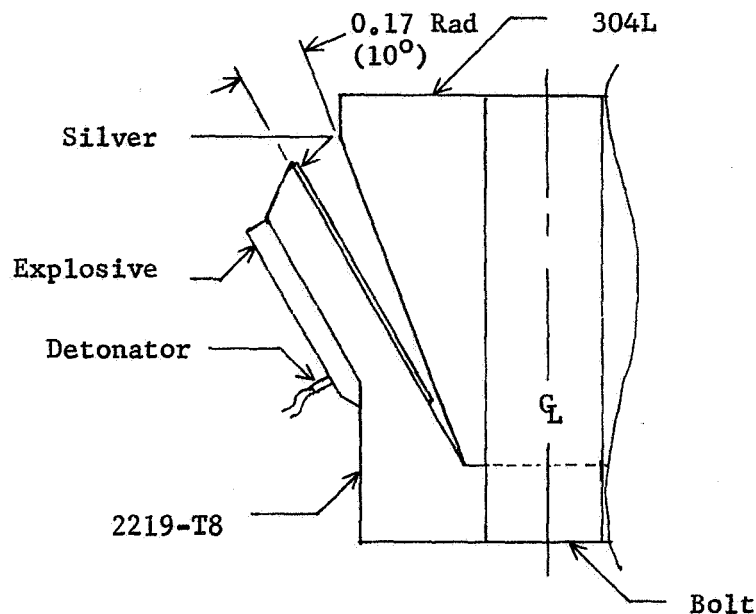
Explosive Bond Joint Method #3 Silver/Aluminum to Stainless
